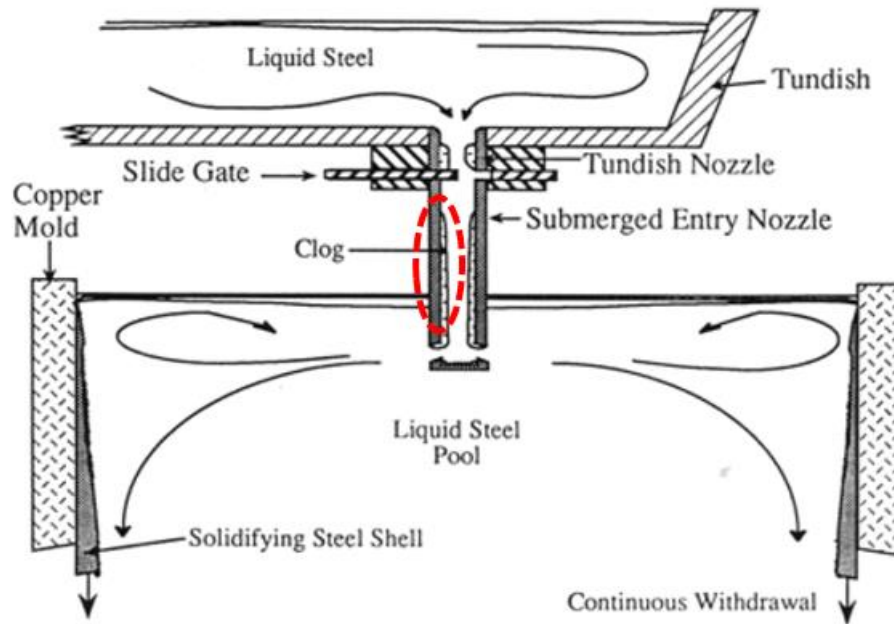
Transfer of steel after secondary steelmaking from tundish to the mold through ceramic nozzles [39]
